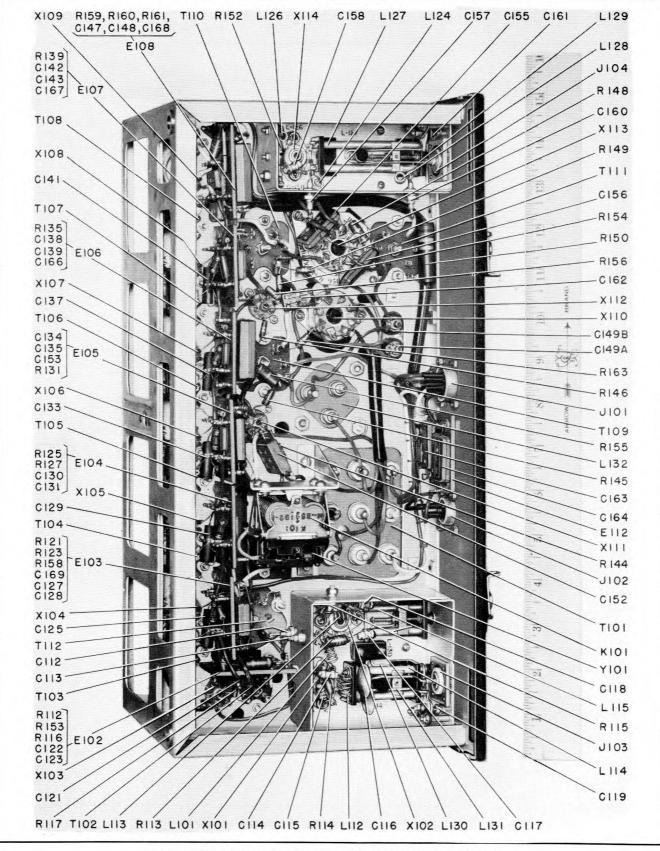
Radio Receiver and Transmitter BC-788-C — Chassis Bottom View (Rear Oblique)
